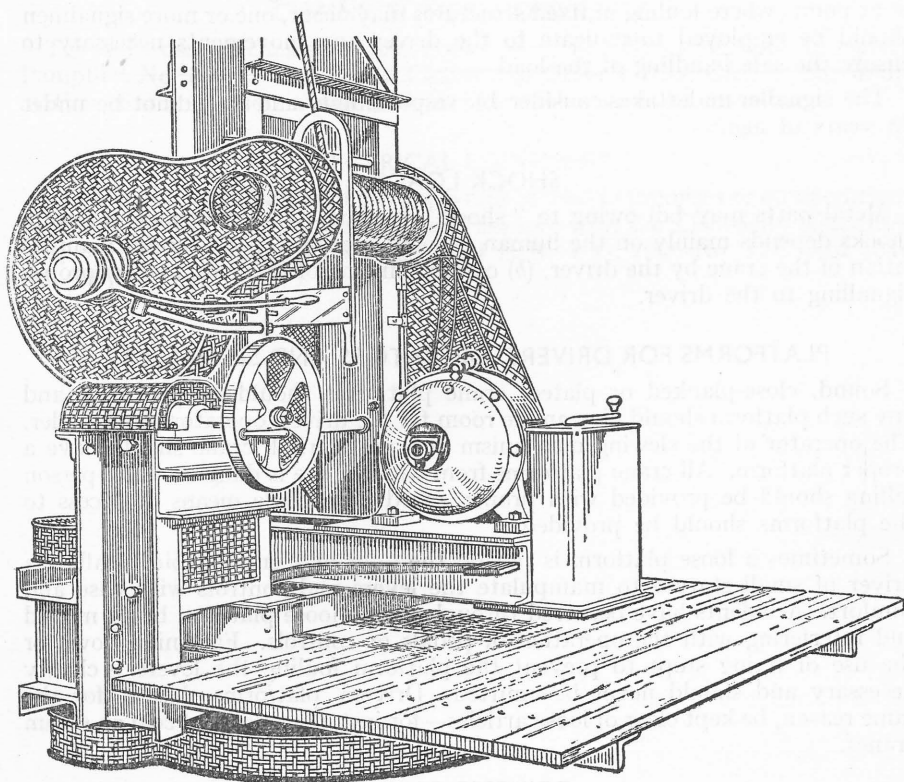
Shows toothed gearing enclosed In wire-mesh guards permitting ready examination.
